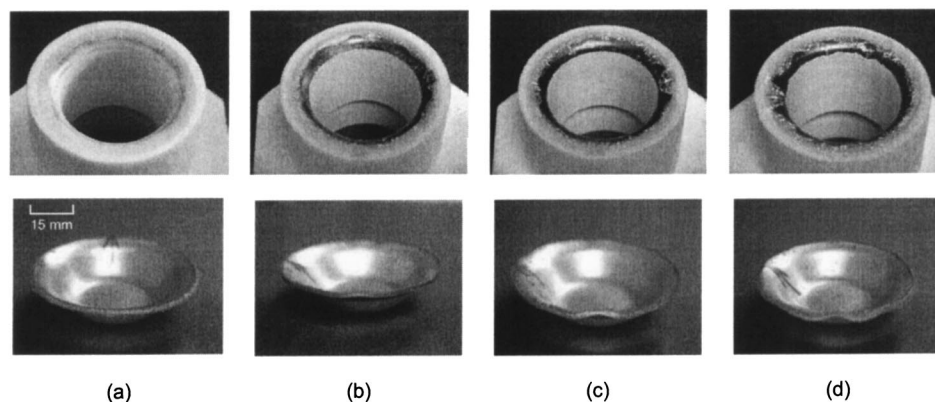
Progressive formation of die wear after (a) 10 parts; (b) 60 parts; (c) 110 parts; (d) 140 parts
